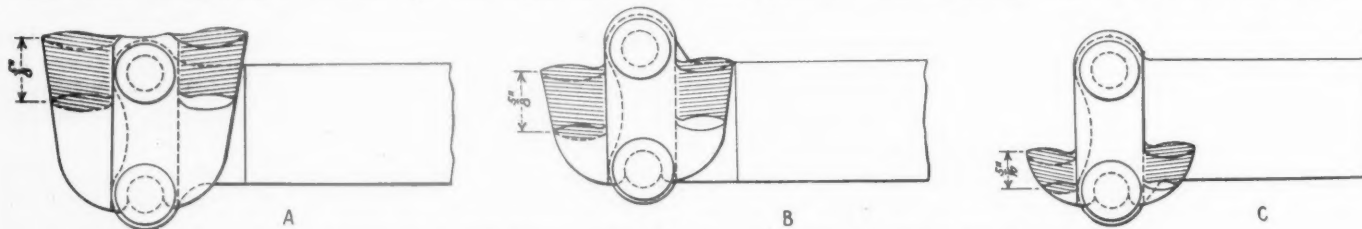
Morris No. 6 Tool-Holder and Double Cutter, the Equivalent of Six Forged Tools
